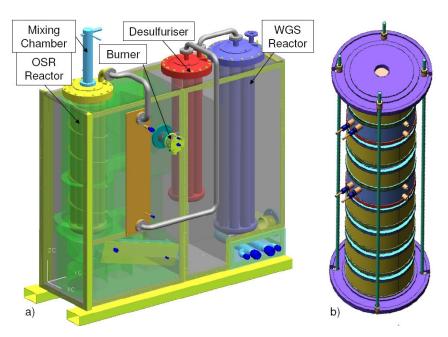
3D views of a) reactor set, and b) PrOx reactor.
